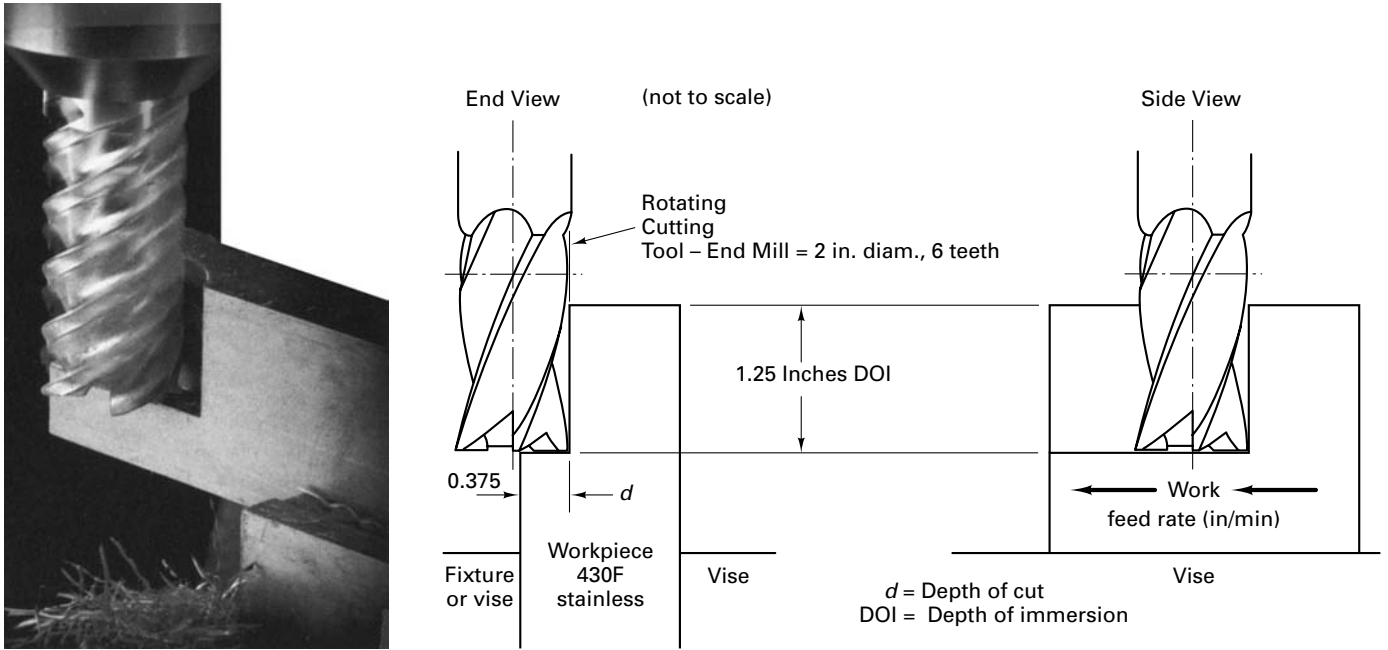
Face milling is often performed on a spindle milling machine using a multiple-tooth cutter ( $n = 6$  teeth) rotating  $N_s$  at rpm to produce cutting speed  $V$ . The workpiece feeds at rate  $f_m$  in inches per minute past the tool. The allowance depends on the tool diameter and the width of cut.
